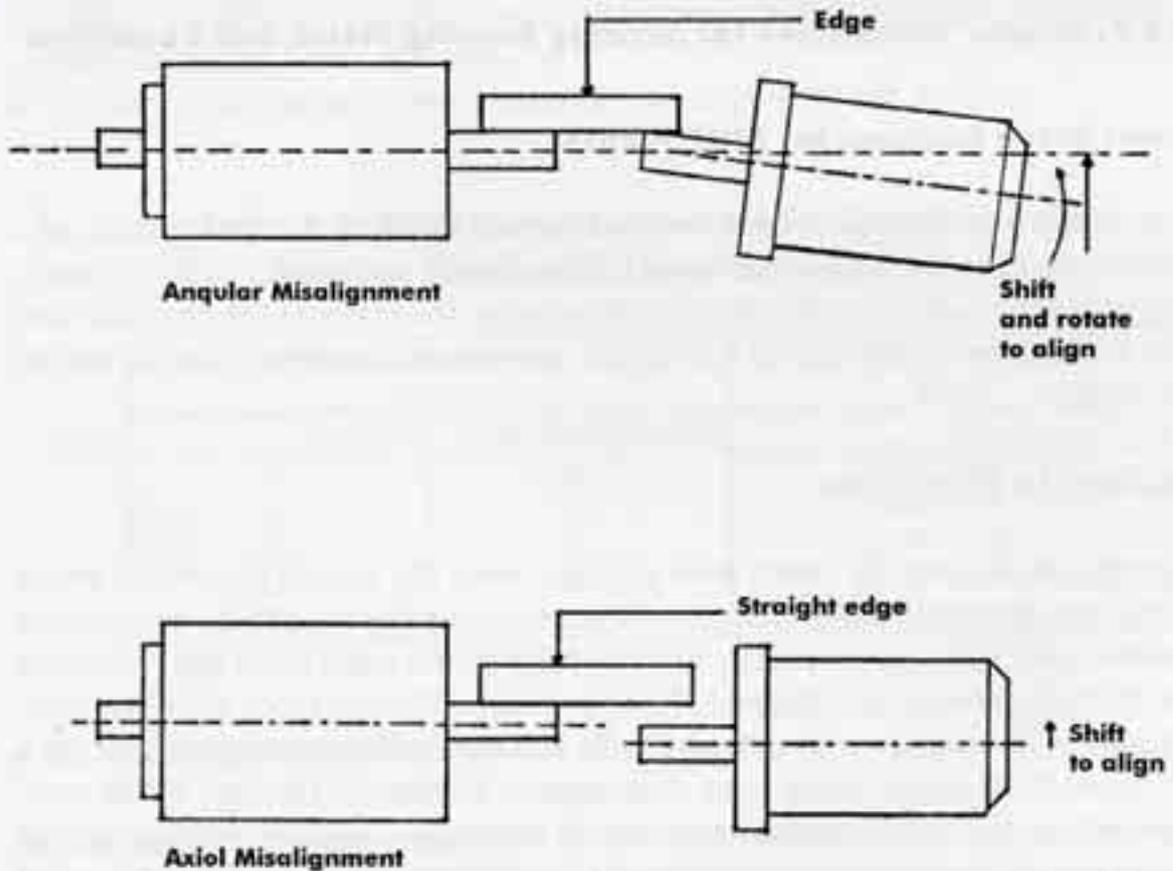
Aligning Two Directly Coupled Shafts Using A Straight Edge
